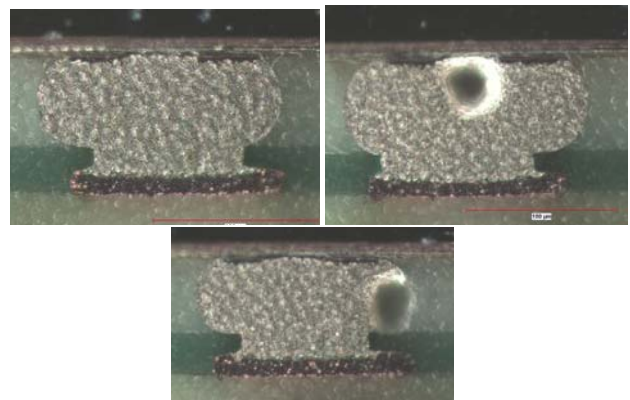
Defect free (top left) and voided (top right) solder bump; void next to solder bump (bottom)
